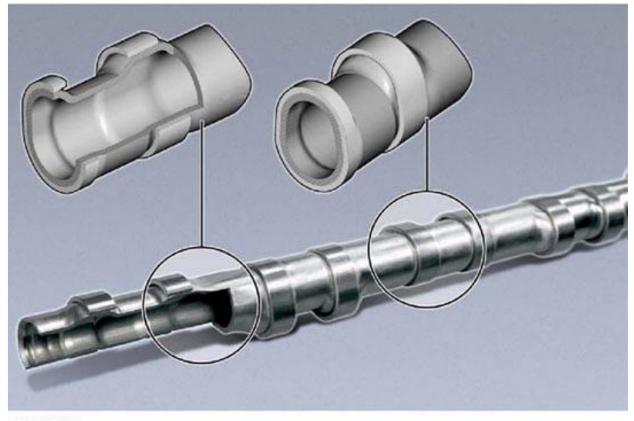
Identifying Valvetrain Components Courtesy of BMW OF NORTH AMERICA, INC.
